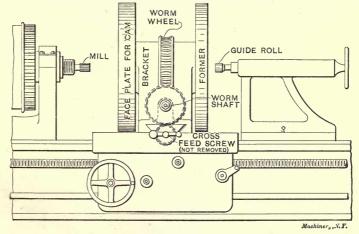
Attachment with Power Feed for Cutting Face Cams
